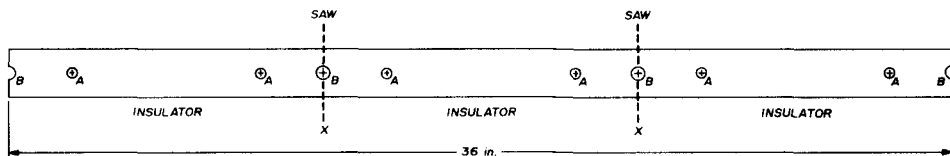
The 36-inch wooden dowels available at your local lumber yard may be cut into convenient lengths and boiled in paraffin or bees wax for use as antenna insulators. The holes marked A are slightly larger than the wire to be used; the holes marked B are twice as large as A.
